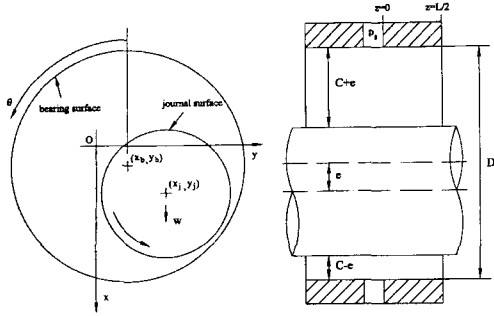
Coordinate system and circumferential grooved journal bearing.
